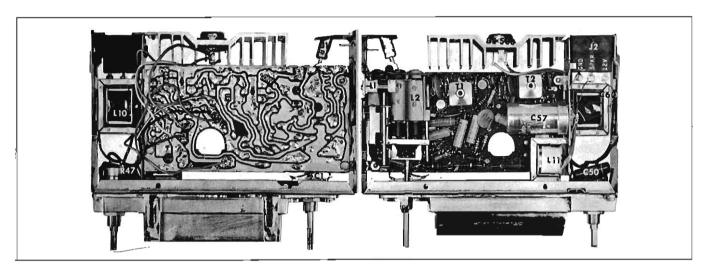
CORVAIR - PARTS LAYOUT - CIRCUIT
